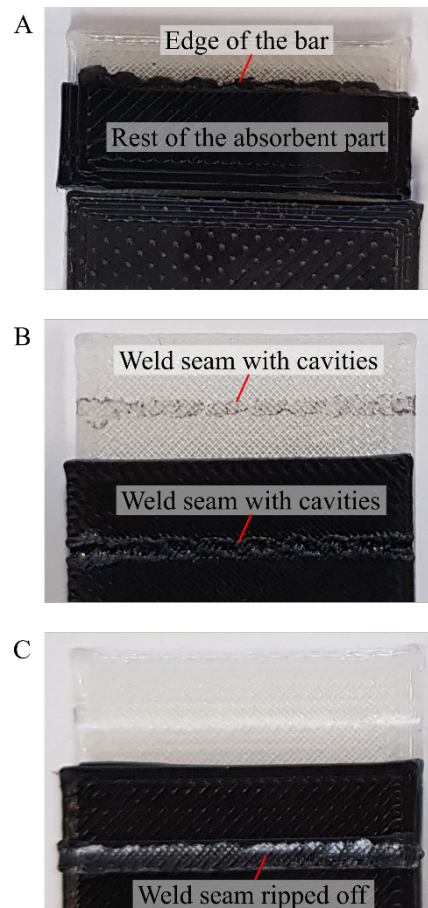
Different failure types of the weld seam strength tested parts. A and C: Parts with a 400 μm high bar, B: without a bar.
